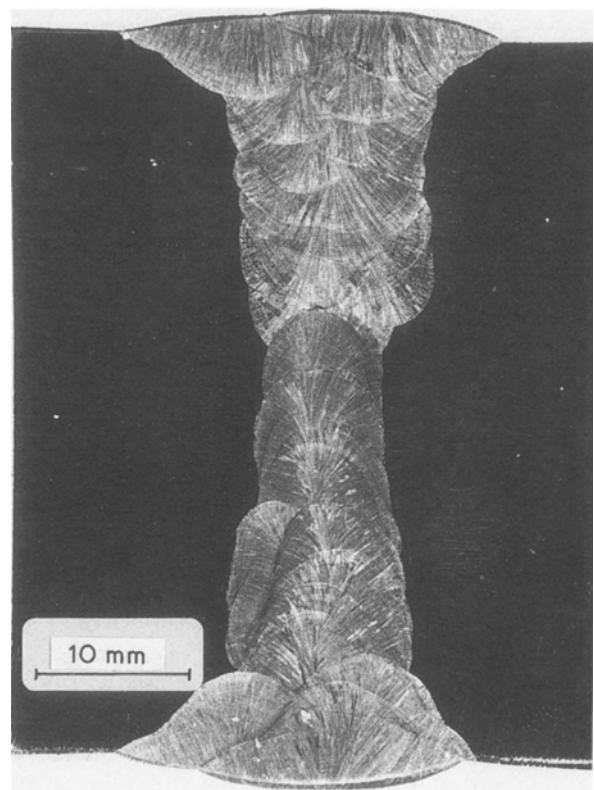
Macroetched view of cross-section from type 316 stainless steel SA weld joint [12].
